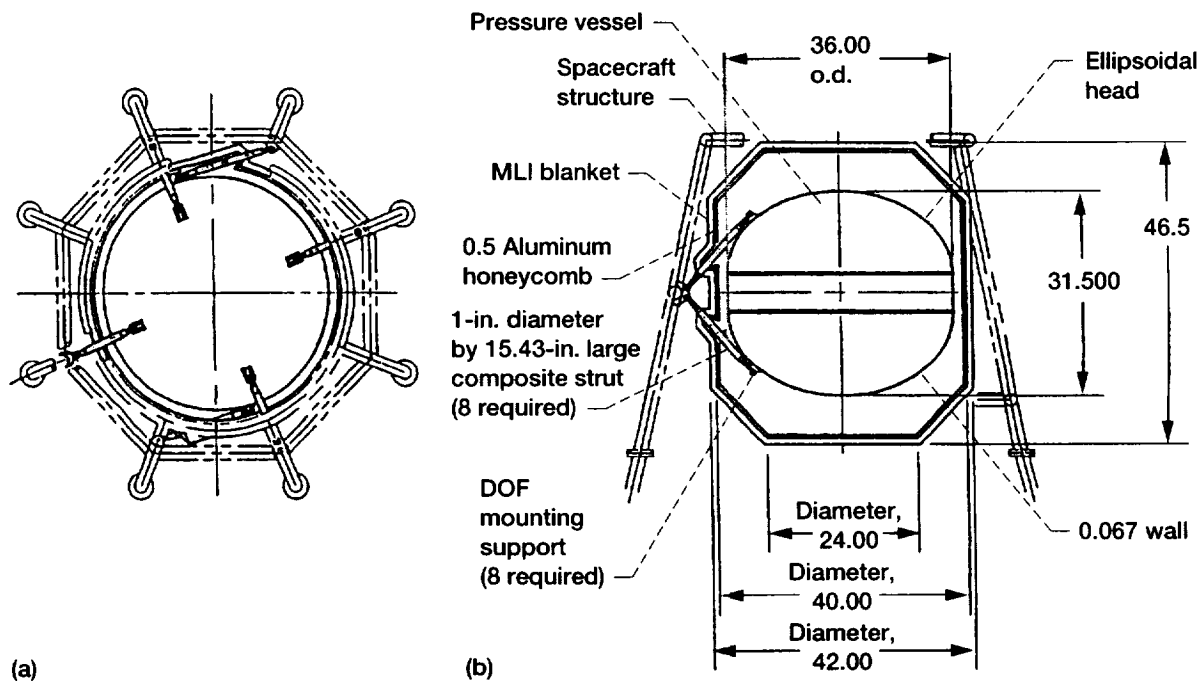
Small receiver tank module. Dimensions are in inches. (a) Top view with top of aluminum honeycomb shield removed. (b) Side view.
